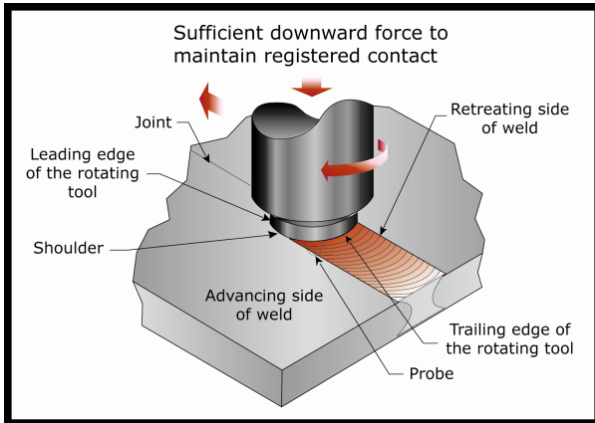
Schematic representation of friction stir butt welding process [1]
